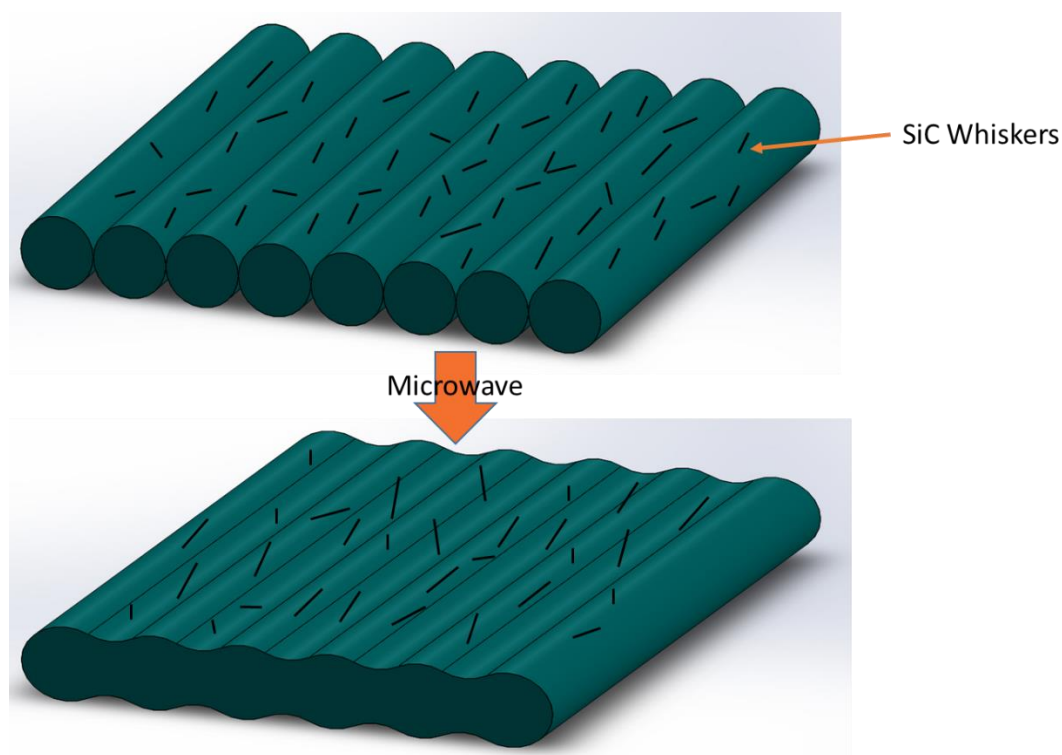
Mechanism of using SiC whiskers to weld 3D printed parts.
